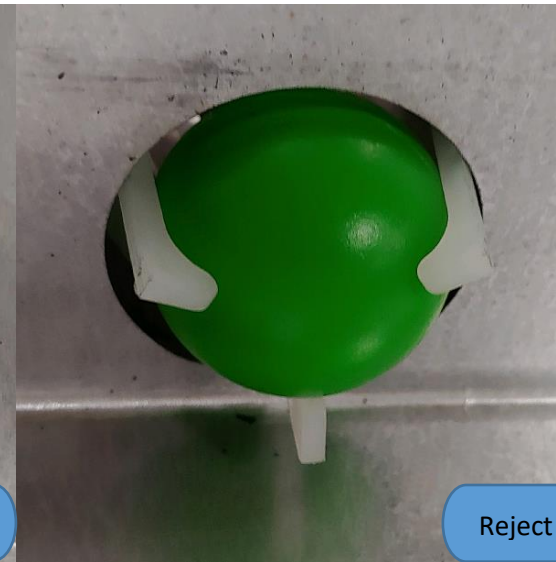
are of the ball check valve assembly. Jayco part # 0322725.
